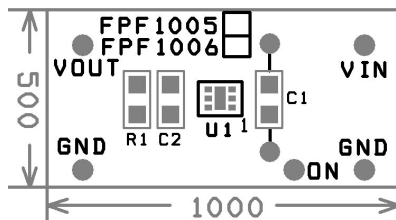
Demo Board Silk Screen Top and Component Assembly Drawing
